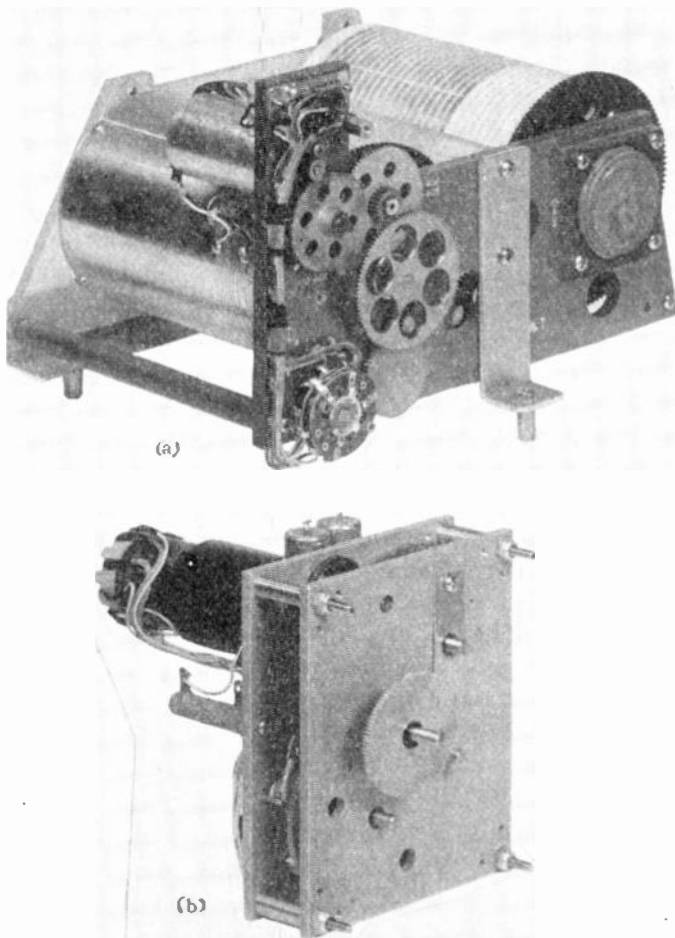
(a) Roller coil showing example of unitized gear drive and component design. (b) Independent type gear drive unit.
